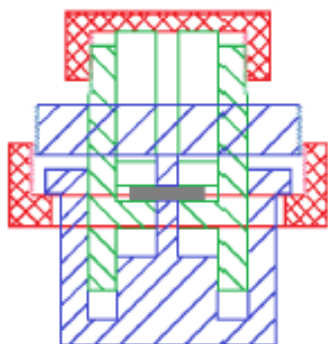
Technical drawing of the mounted Shale Puncher (Stenebråten, et al. 2008)
